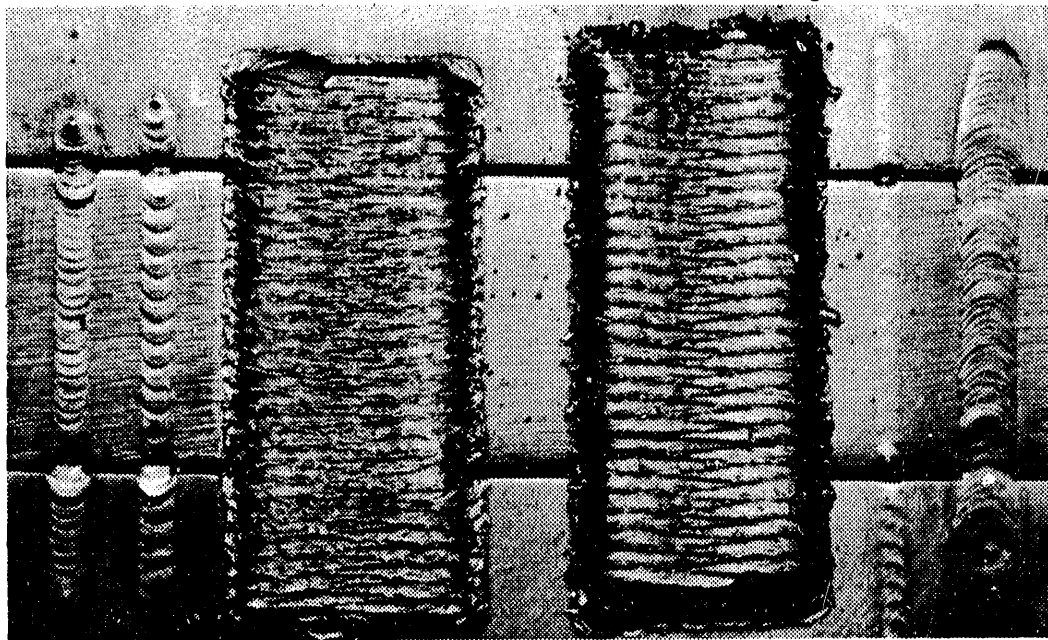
Overlay welds (one inch wide bands in center) and stringer beads (narrow welds on either side) across helium charged plate (center plate)
